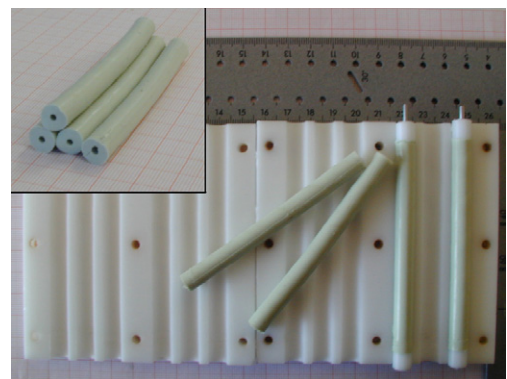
Dielectric elastomer tubes and moulds used for their fabrication.
